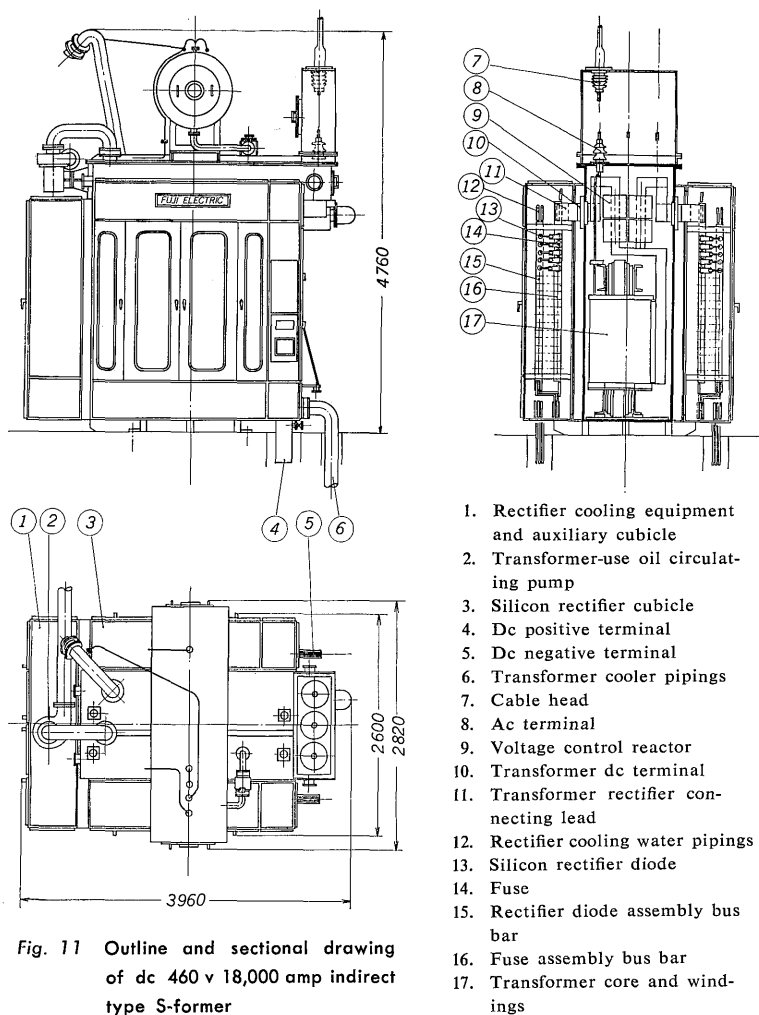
Outline and sectional drawing of dc 460 v 18,000 amp indirect type S-former
